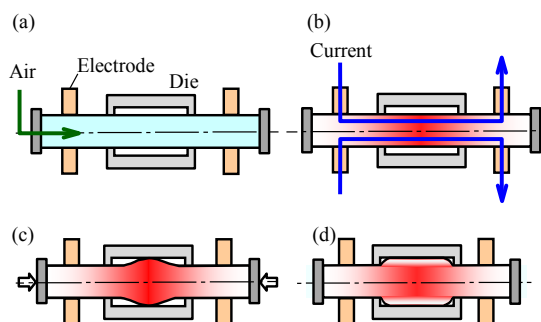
Sequence of gas forming of aluminium alloy tube using air filled into sealed tube and resistance heating. (a) Filling air pressure, (b) start of heating, (c) start of axial feeding and (d) ends of heating and axial feeding.
